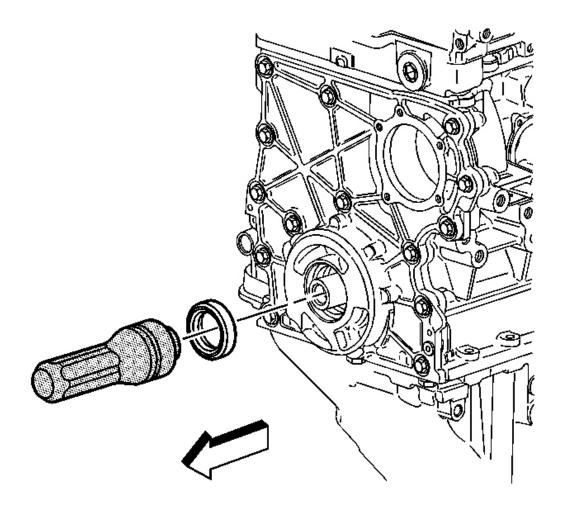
Installing Crankshaft Front Oil Seal Using J 44218 Courtesy of GENERAL MOTORS CORP.
